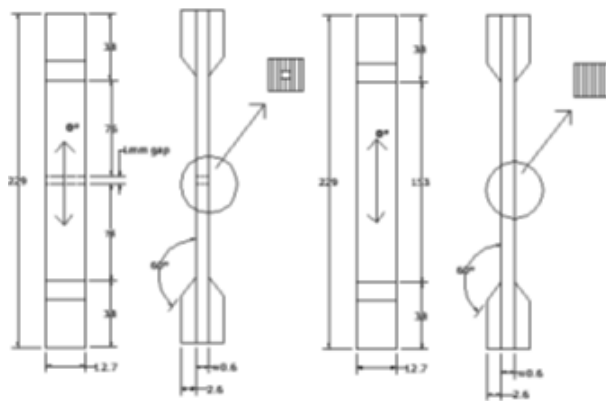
Tensile test specimen (with gap and no gap) testing machine
